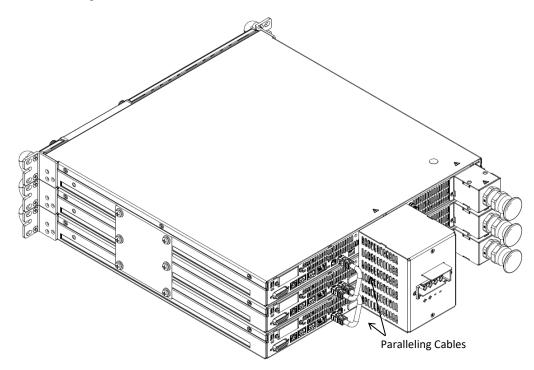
Three 150V-600V Units Paralleling Cables Connection
